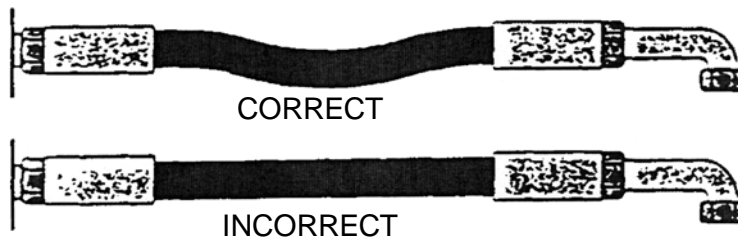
HOSE AND MACHINE TOLERANCES
